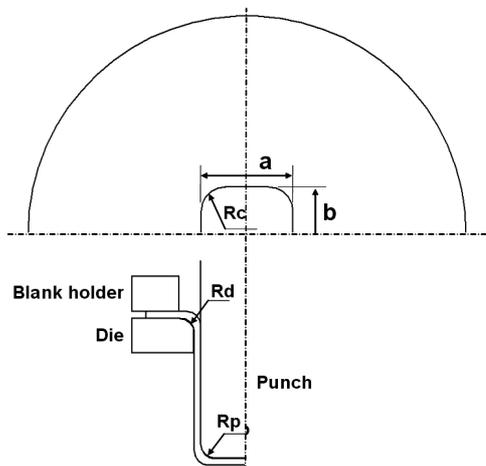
Geometric parameters of square cup deep drawing die & punch
